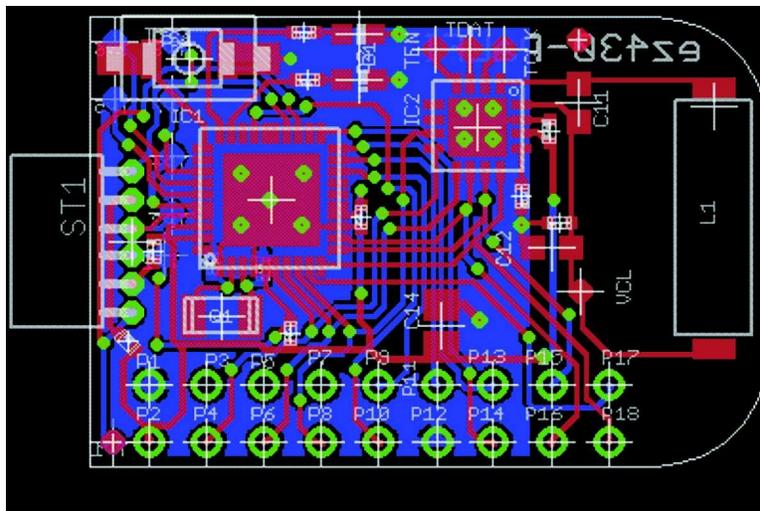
eZ430-TMS37157 Target Board, PCB Layout
